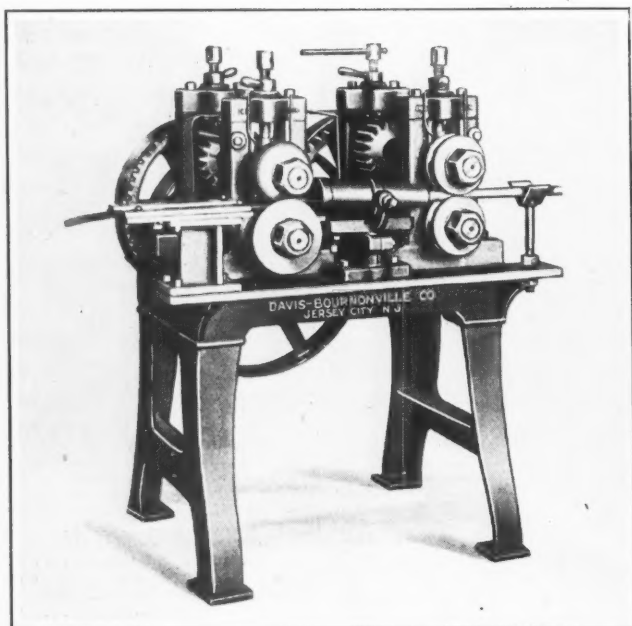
Two-roll Stand Type of Tube-forming Mill
